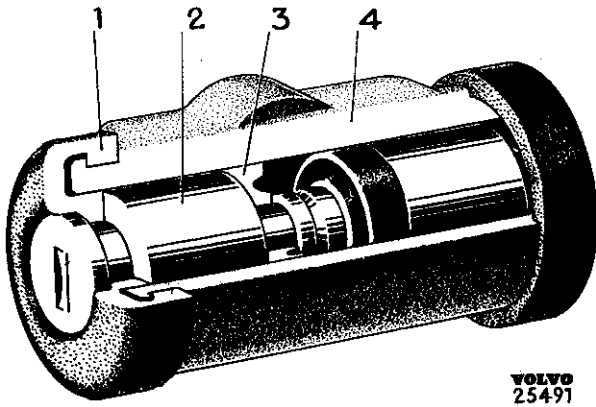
Rear wheel brake unit cylinder on vehicles fitted with disc brakes at front.
